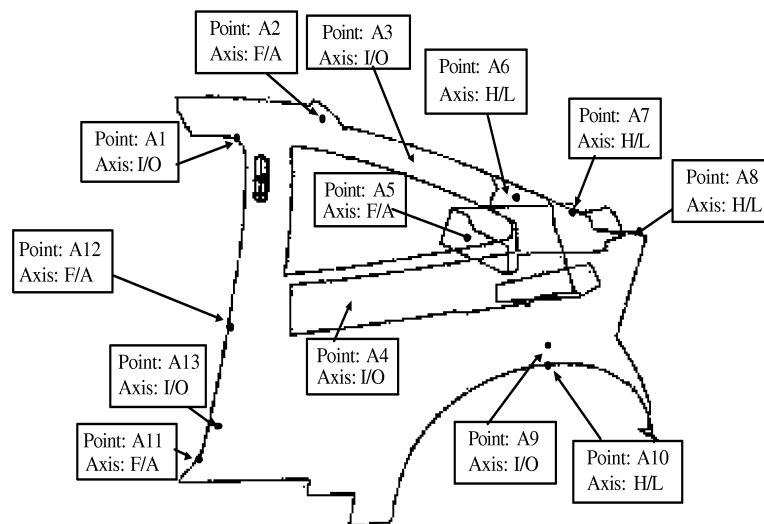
Quarter Panel Assembly Measurement Points and Axis of Measure
